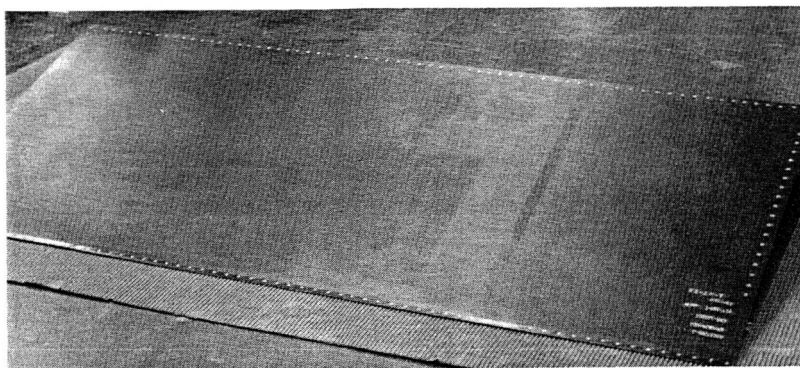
Sonic Test Box (Test 15) Showing Assembled Test Box
